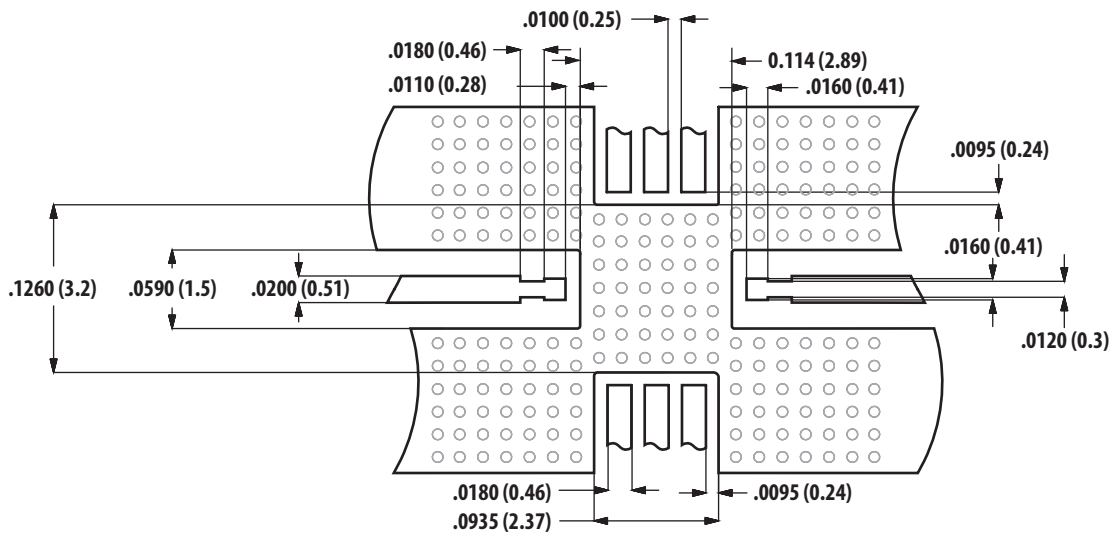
Suggested PCB Land Pattern and Stencil Layout
